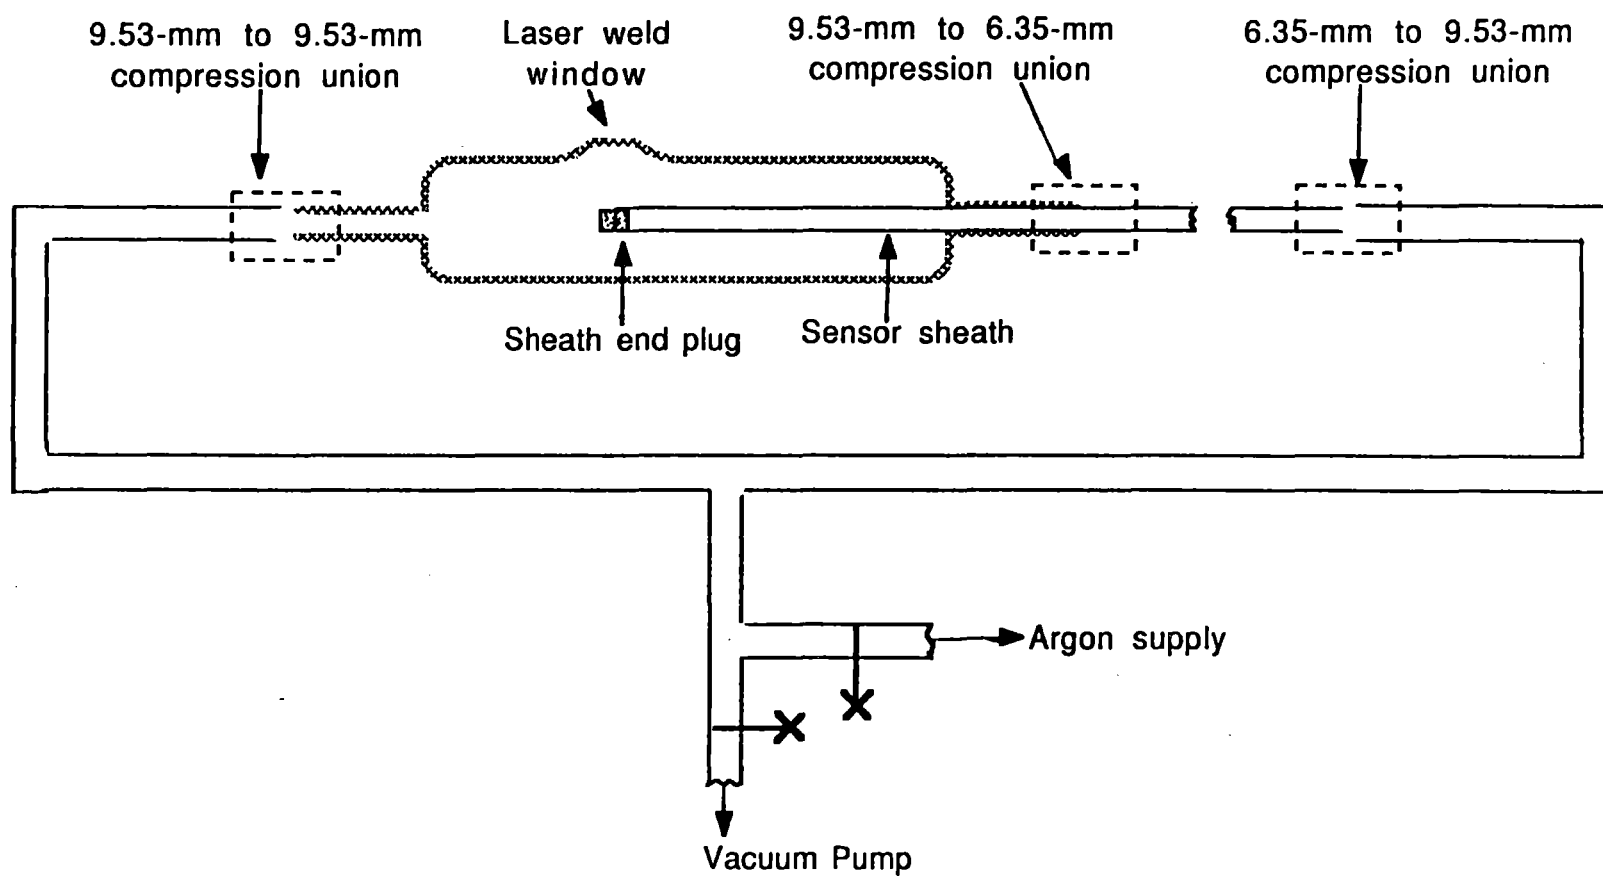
Jig for end plug laser weld: gas and vacuum connection arrangement.
